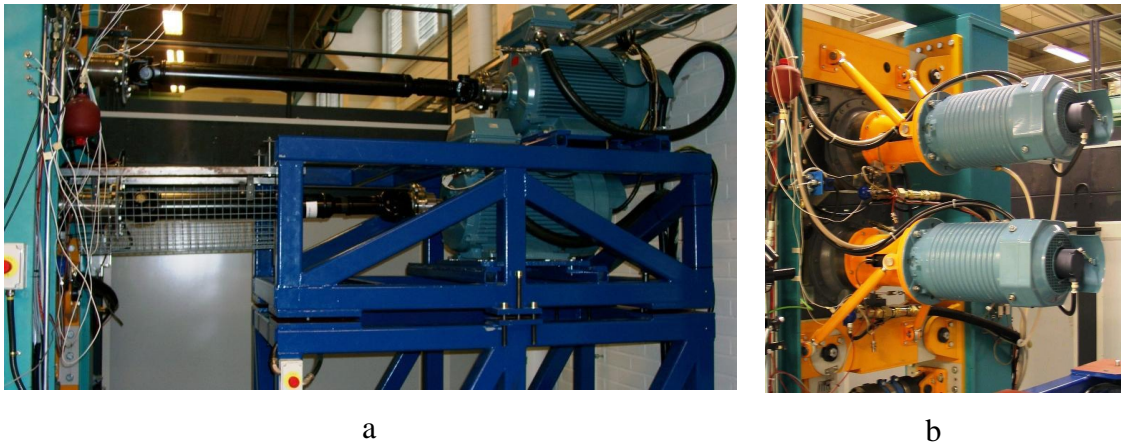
a) Conventional AC motors, where gearboxes have been removed and only universal shafts are in use, b) direct drive AC motors fitted on the ends of the rolls.
